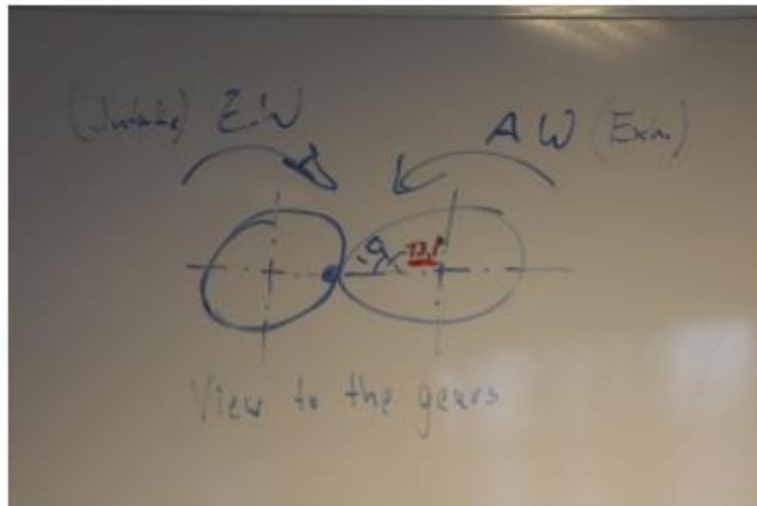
Drawing, Synchronisation of the cam shaft drive gears
